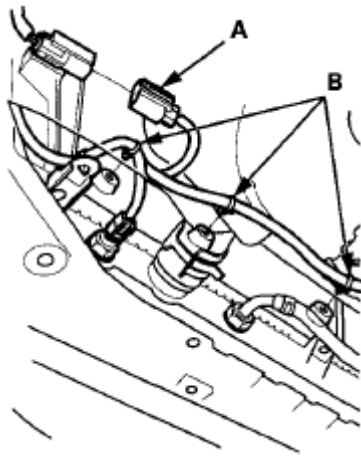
Identifying Radiator Fan Motor Connector And Harness Clamps
